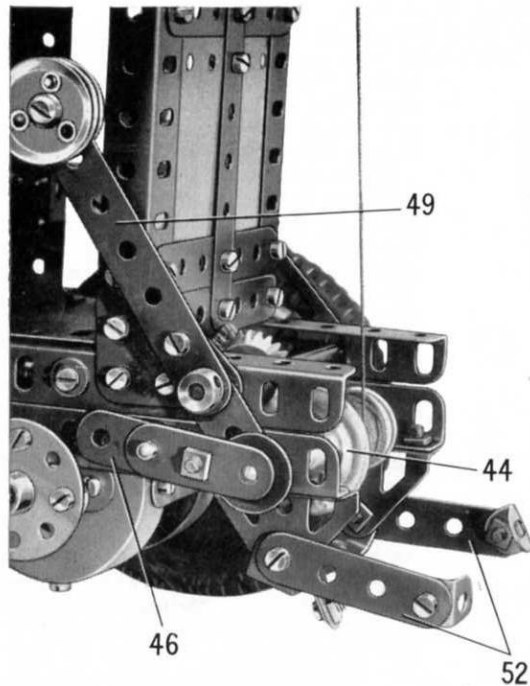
The balance weight and lever fitted to one end of the winding drum shaft
